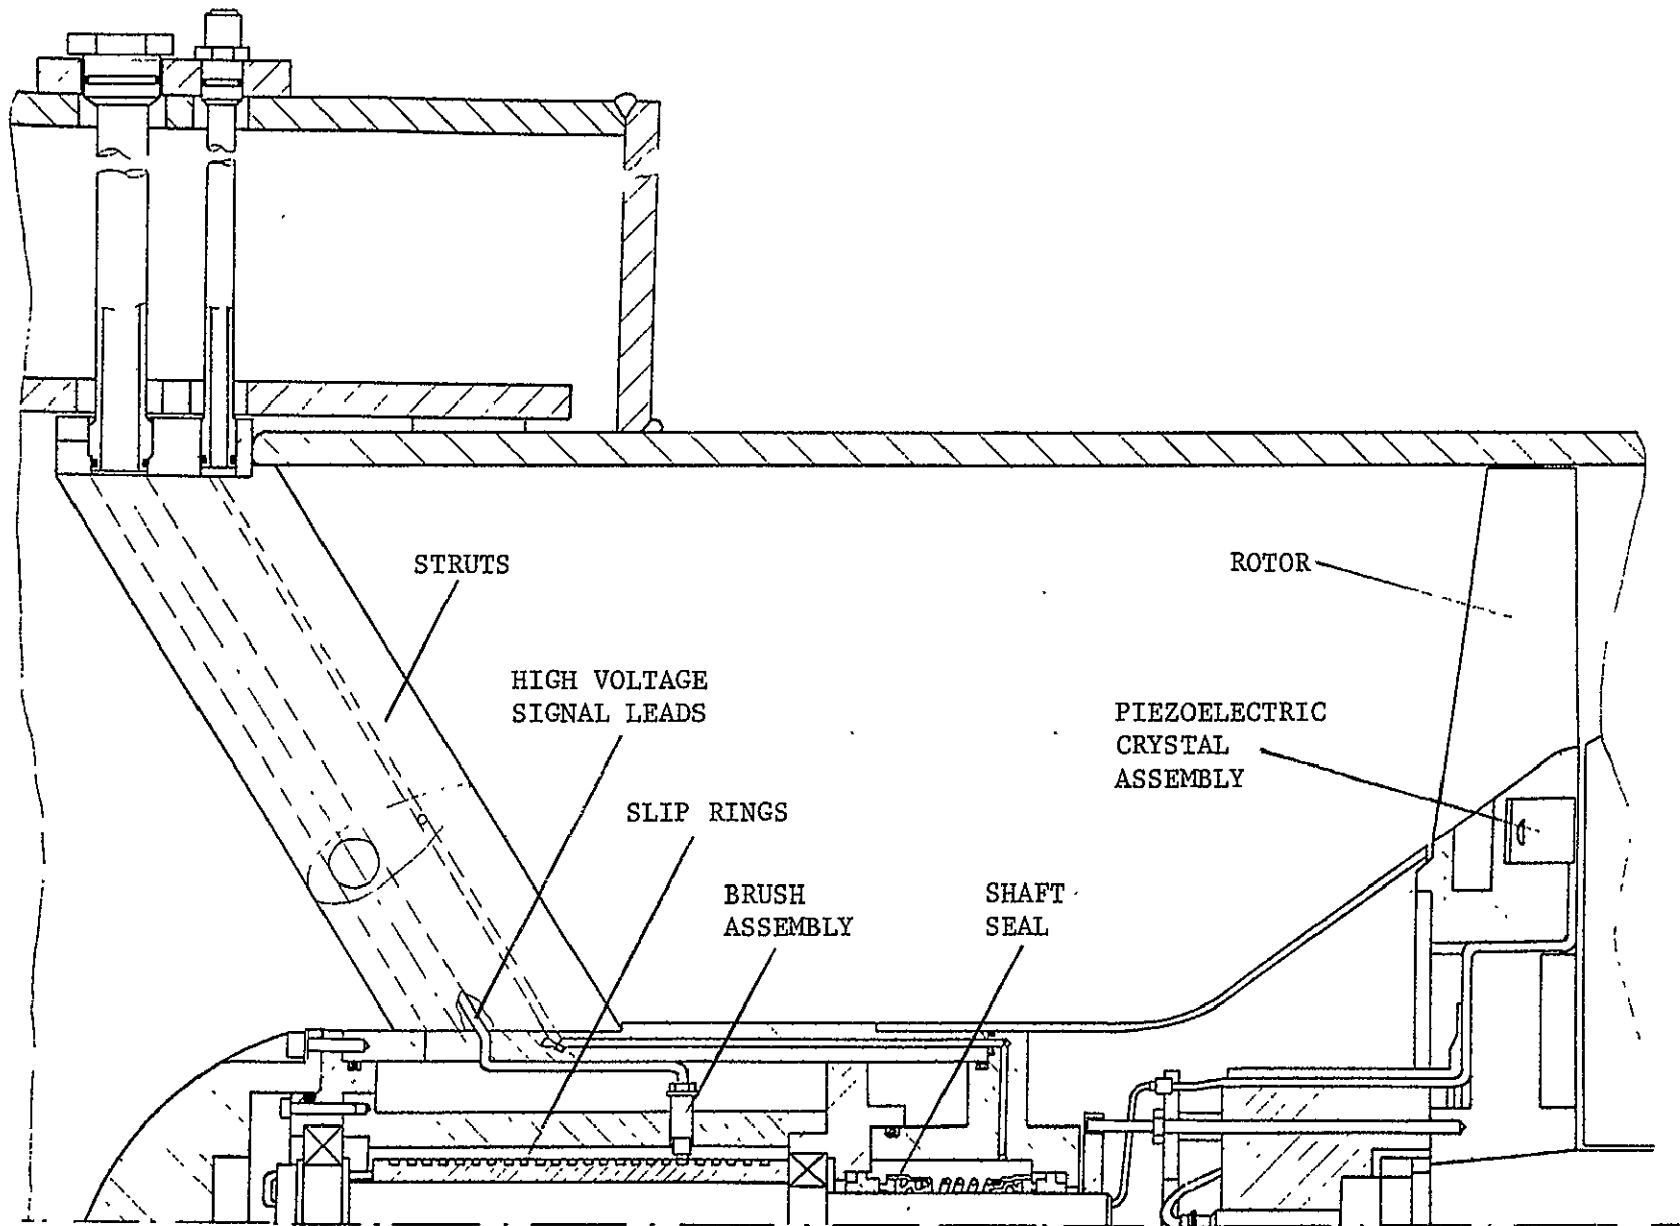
Cut away view of the rotor, shaft and forward centerbody
